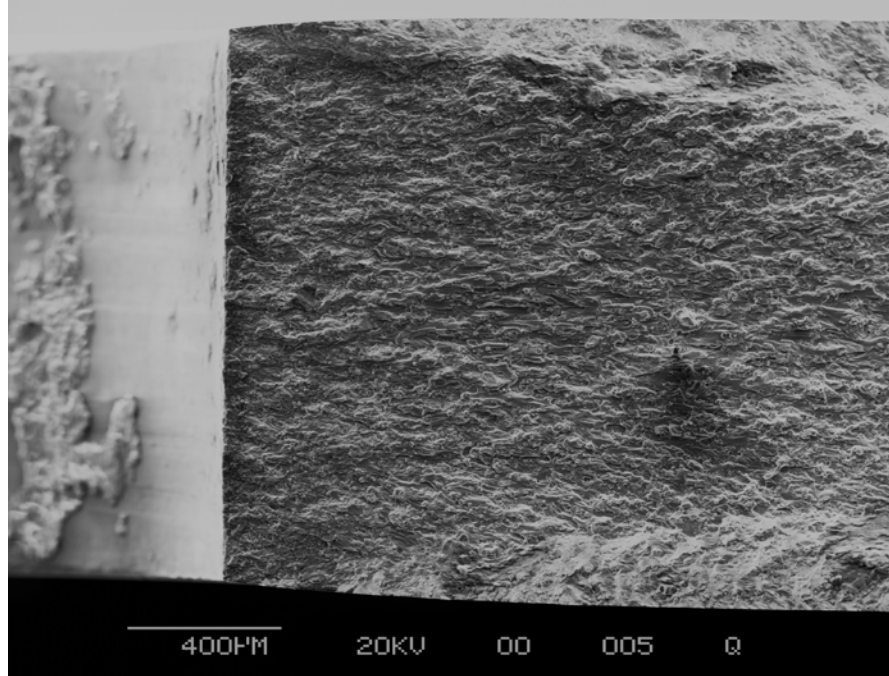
Fracture surface of specimen 7 showing crack initiation area
